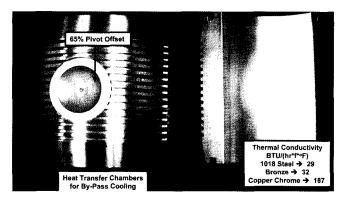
34,500 HP Pinion Bearing, 65 Percent Offset Chrome Copper Pads with Heat Transfer Chambers.
